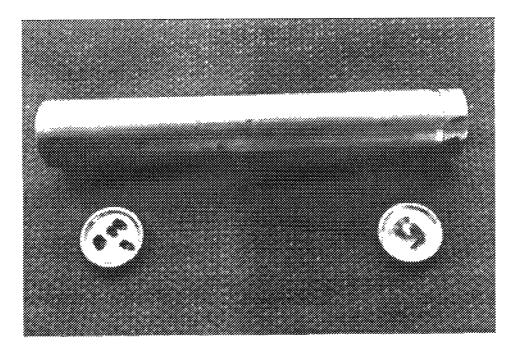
Stainless steel capsule for radium sources (needles and the like) before welding.
